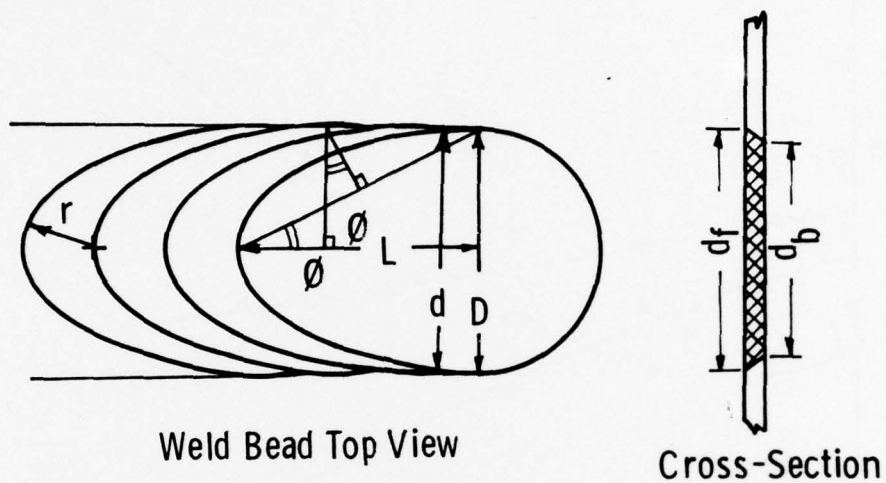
Definitions related to weld bead and pool shapes
